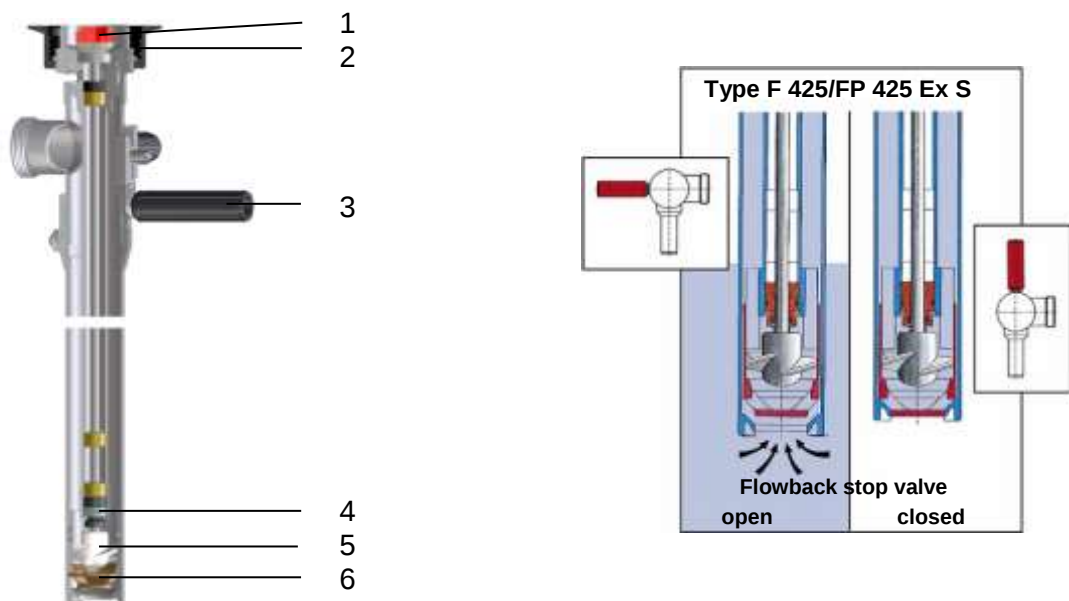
Cross-section of F 425 / FP 425 Ex S and operating principle (sample view)
